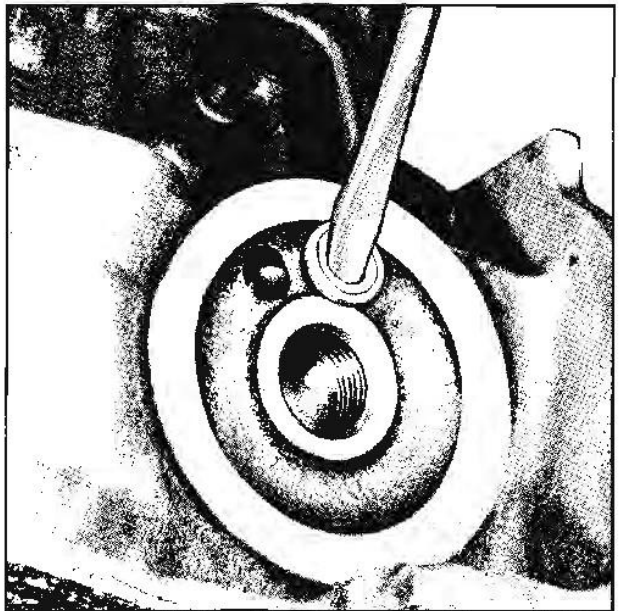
A-31 Removing Oil Filter By-Pass Valve
